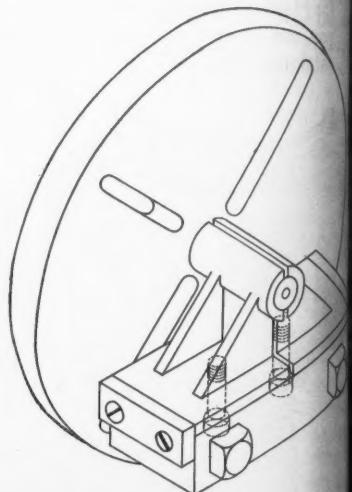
Half Nuts and Leadscrew in Fixture for Centering the Fixture
